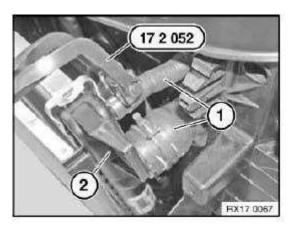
Coolant Hoses, Radiator And Special Tools (17 2 052) Courtesy of BMW OF NORTH AMERICA, INC.
